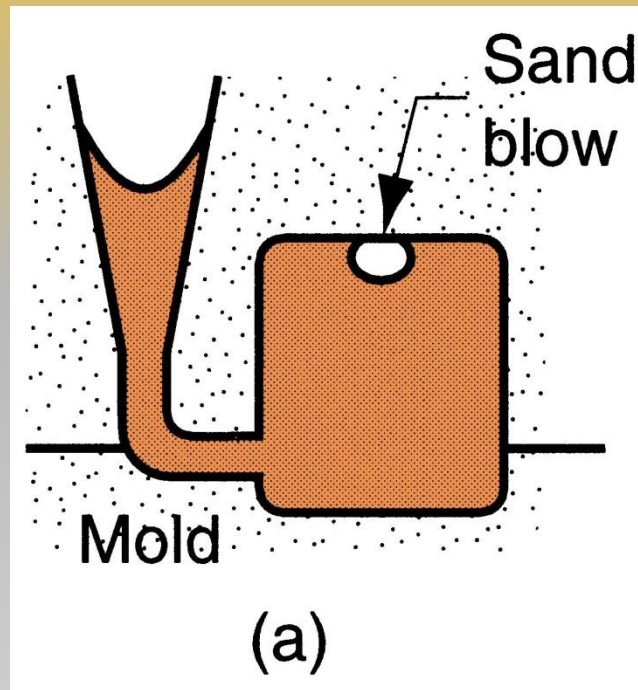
Common defects in sand castings: (a) sand blow
